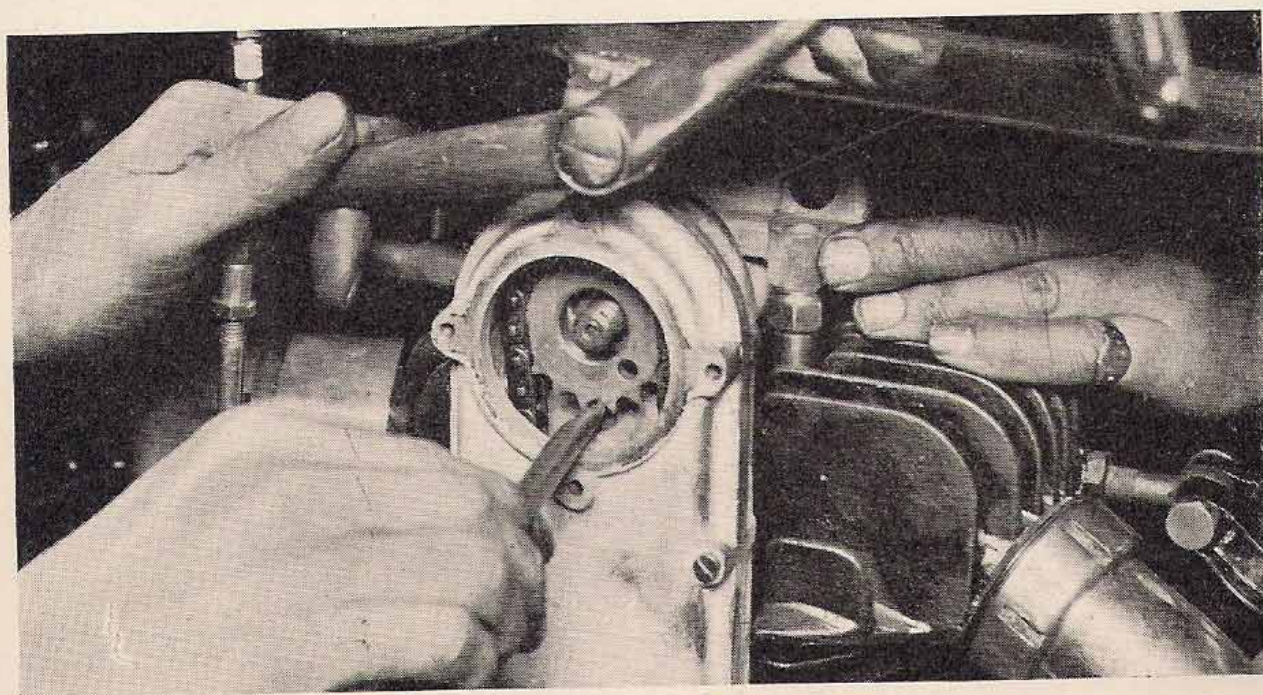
METHOD OF REMOVING CYLINDER HEAD.
